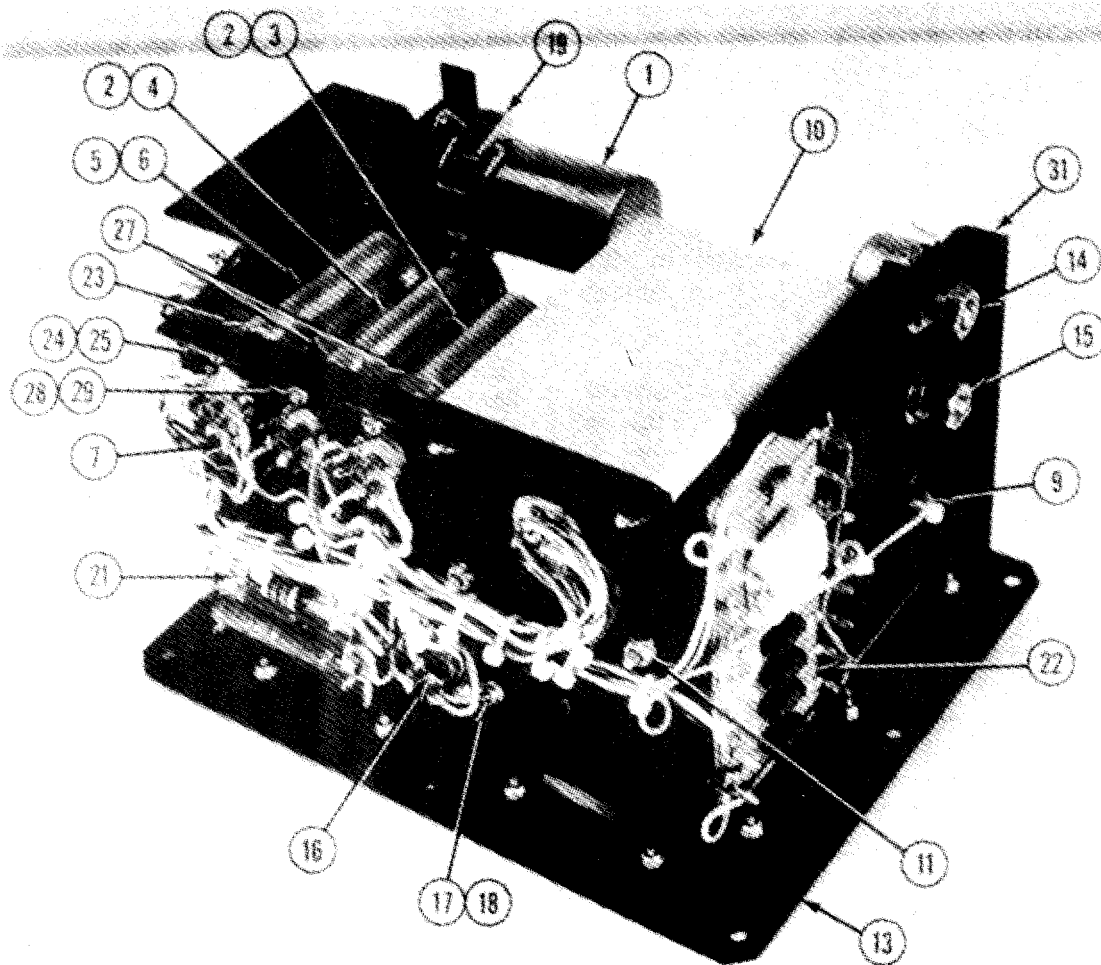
BH146 Takcal assembly (sheet 1 of 2).
